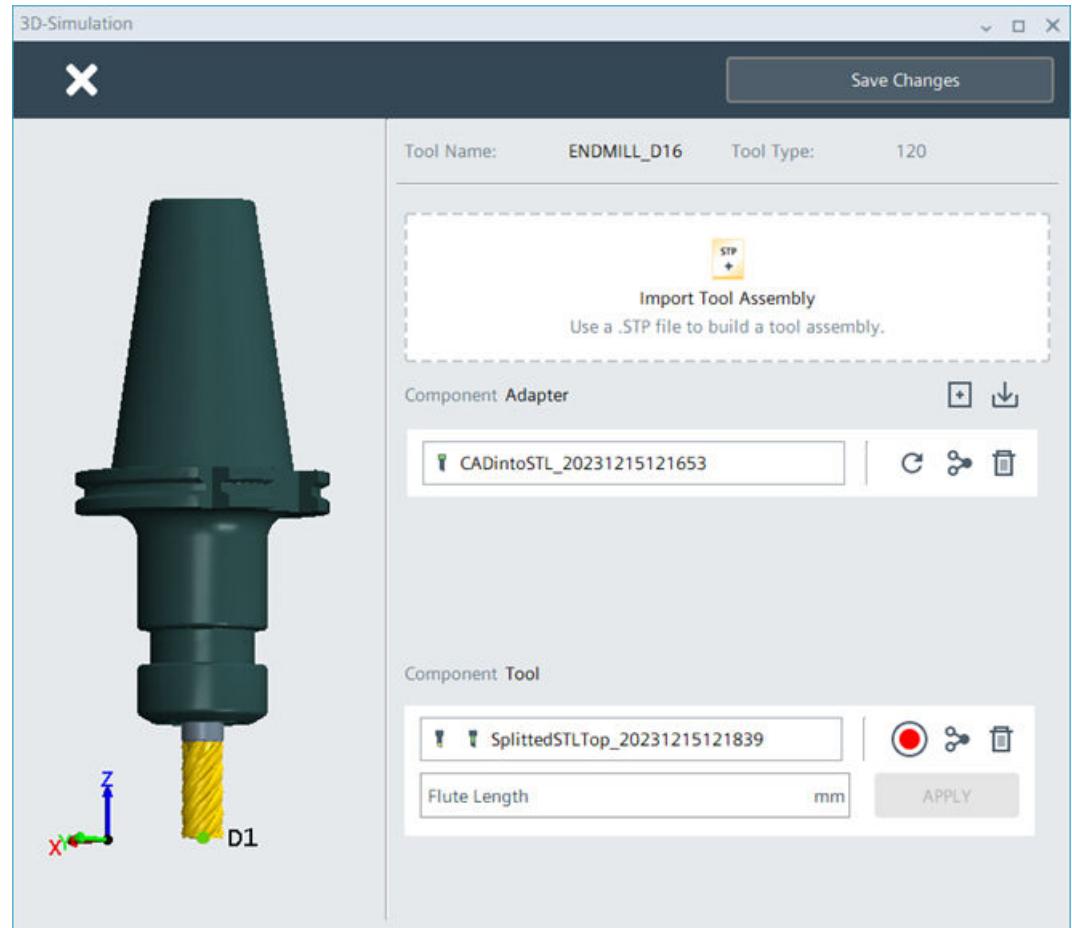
Tool positioned on cutting edge D1 using end mill as an example
